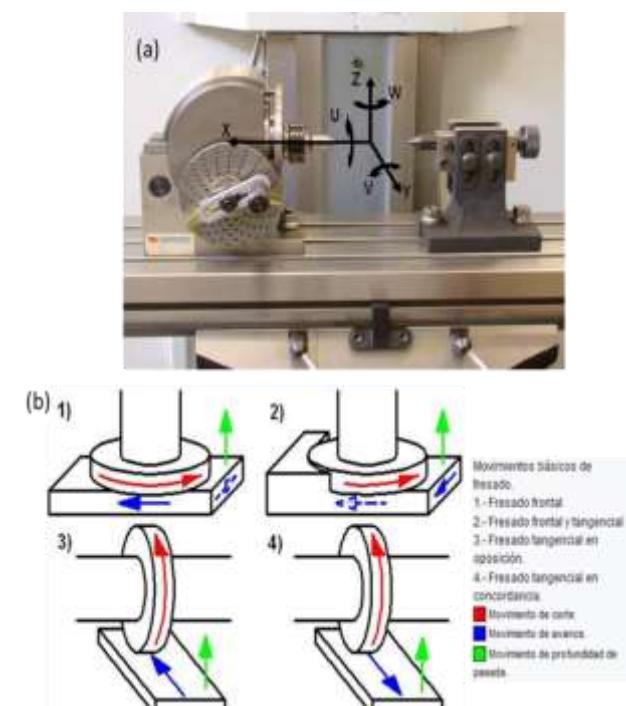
a) Milling cutter motion axis (b) Milling cutter basic motion [1,2]
